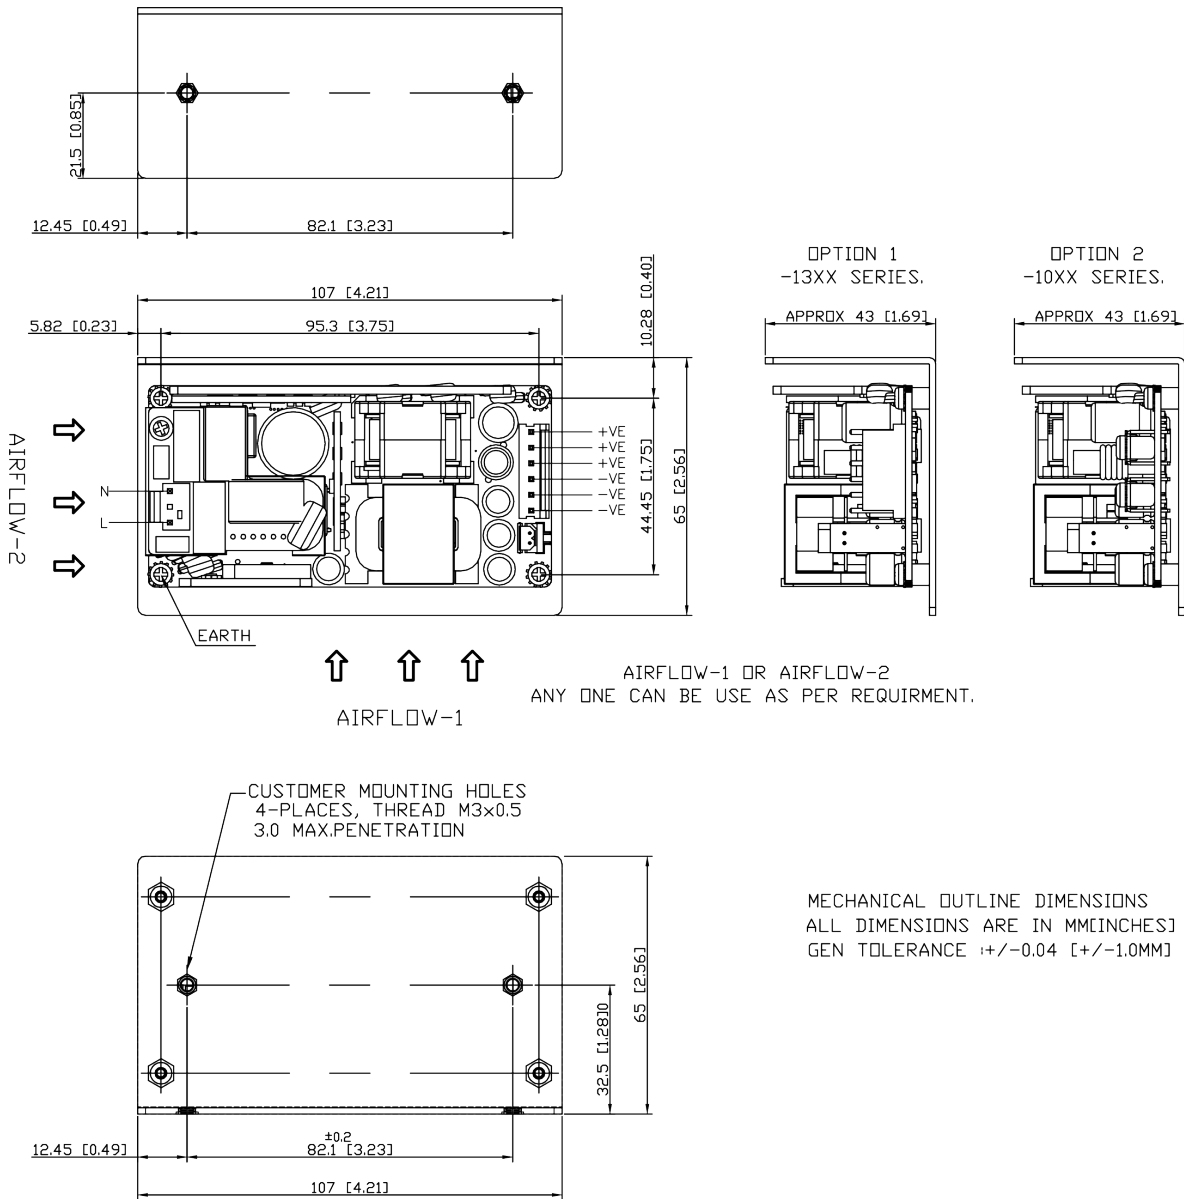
Mechanical Drawing – EPG300-1XXX-L
